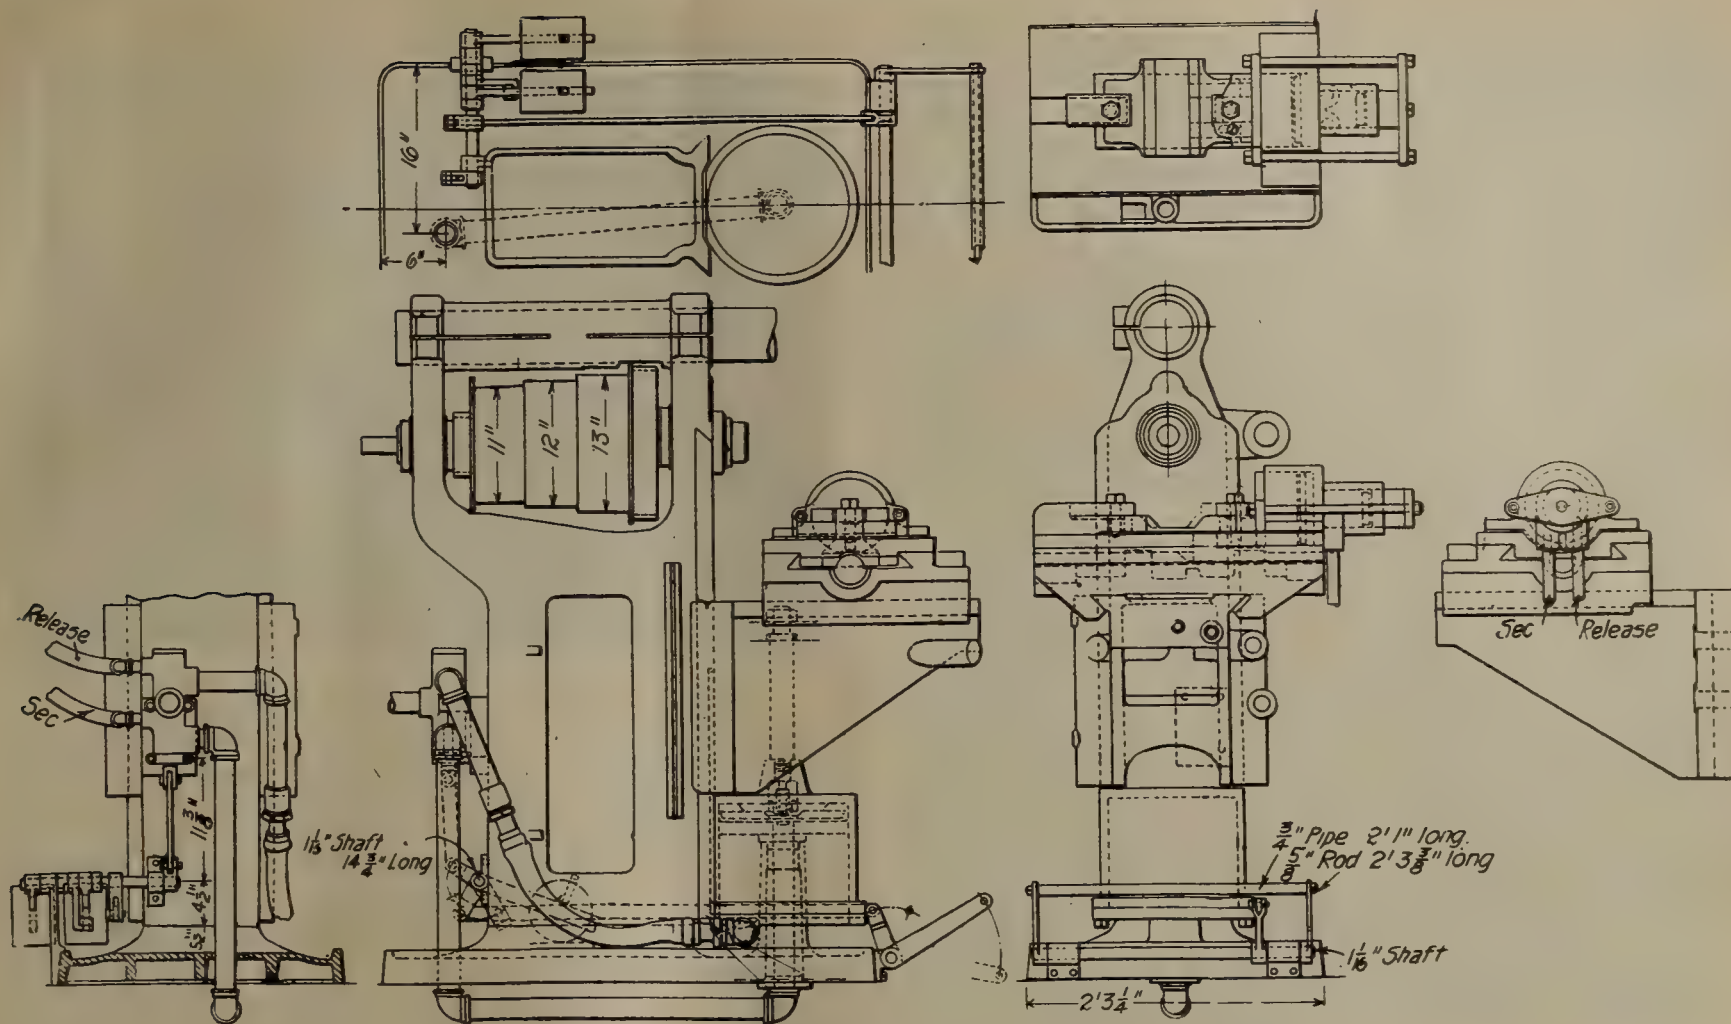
Arrangement of Machine for Milling Journal Brasses.
